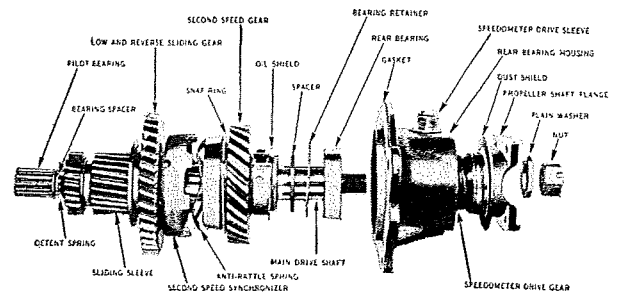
Group No. 20 Oldsmobile Main Drive Shaft Parts
